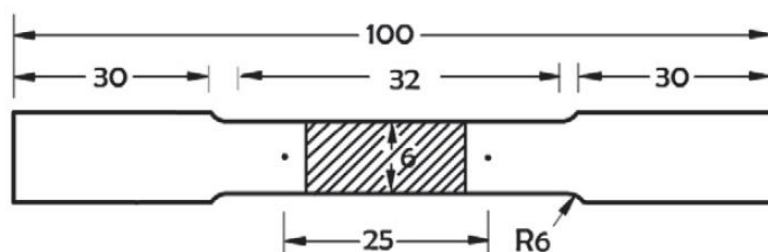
Flat tensile test sample specifications, all dimensions in mm [79]
